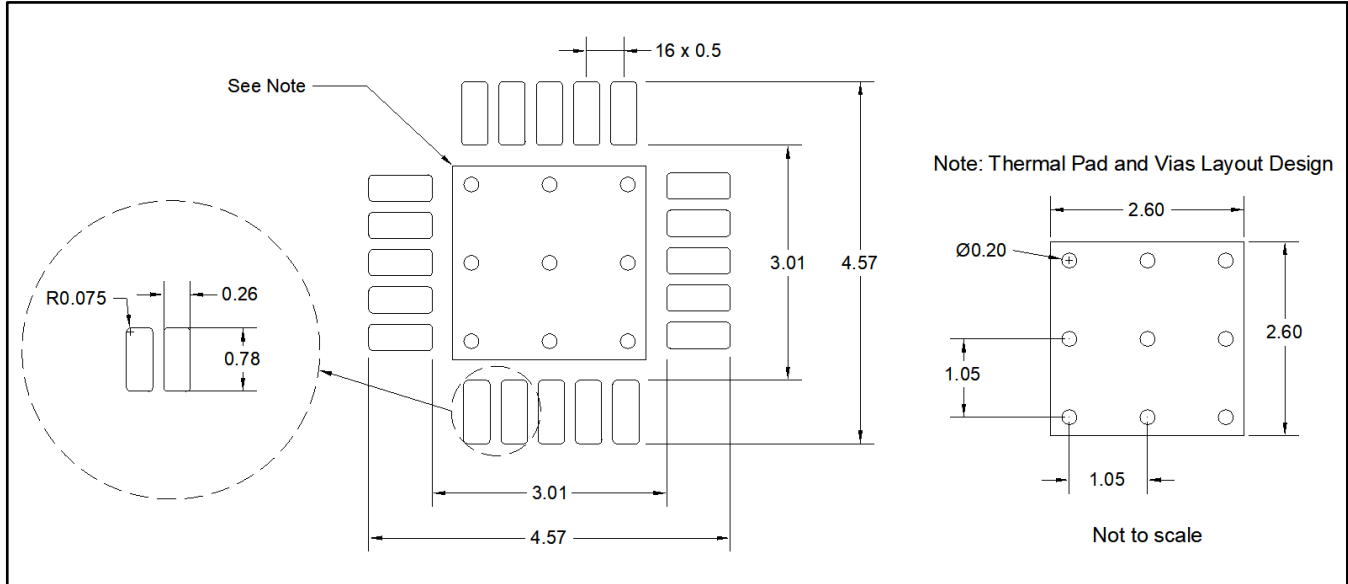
QFN 20L 4.0mm × 4.0mm package soldering footprint (NOT TO SCALE)
